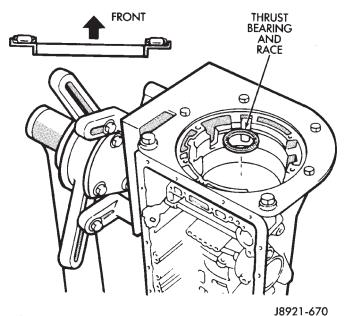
Installing Thrust Bearing And Race (No. 10)
